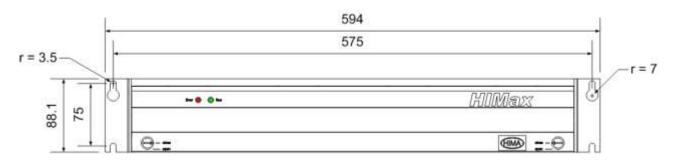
Dimension Drawing for System Fans 18 01 and 18 03
